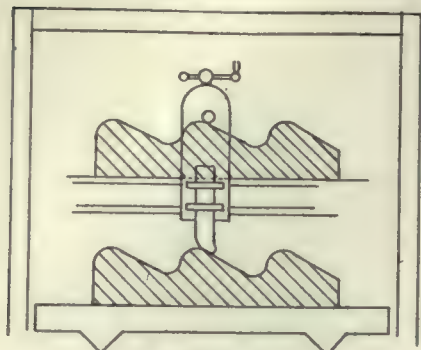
Broaching Machine for Slotting Knitting Machine Part.
